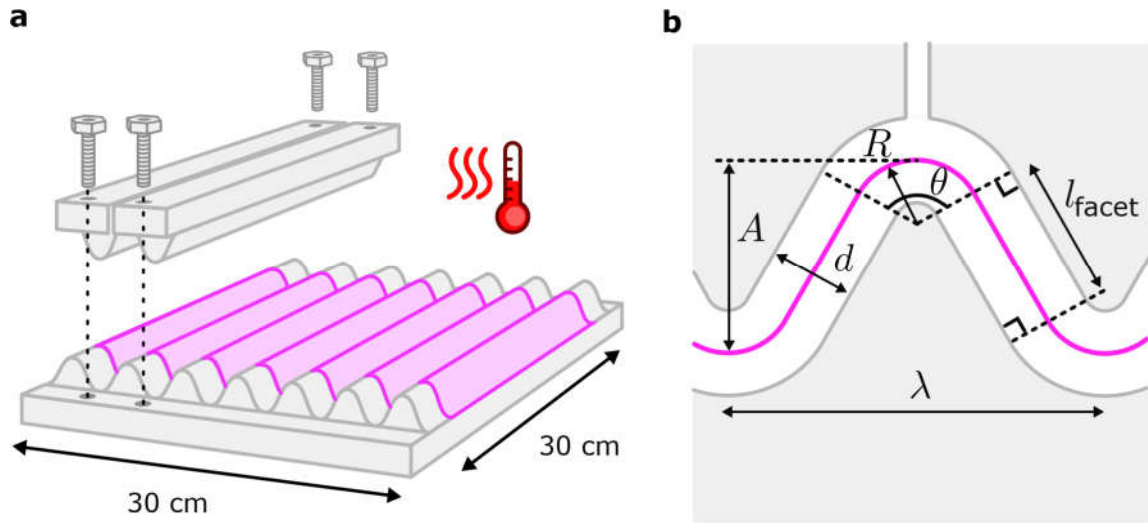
Static thermoforming with a heated mould. a, Schematic illustration of the process. Flat plastic film (pink) is placed on an aluminium mould (grey) with machined grooves. Rods with a complementary shape push the film into each groove and are fastened on the mould with screws. The effective forming surface is 30 cm in each direction. The mould is heated in a commercial oven to thermoform the confined film. b, Mould groove geometry. Amplitude A , wavelength λ , mean radius R , curve angle θ , facet length l_{facet} and mould spacing d to accommodate the film's finite thickness are shown. The film's mid-surface (pink line) is indicated.
